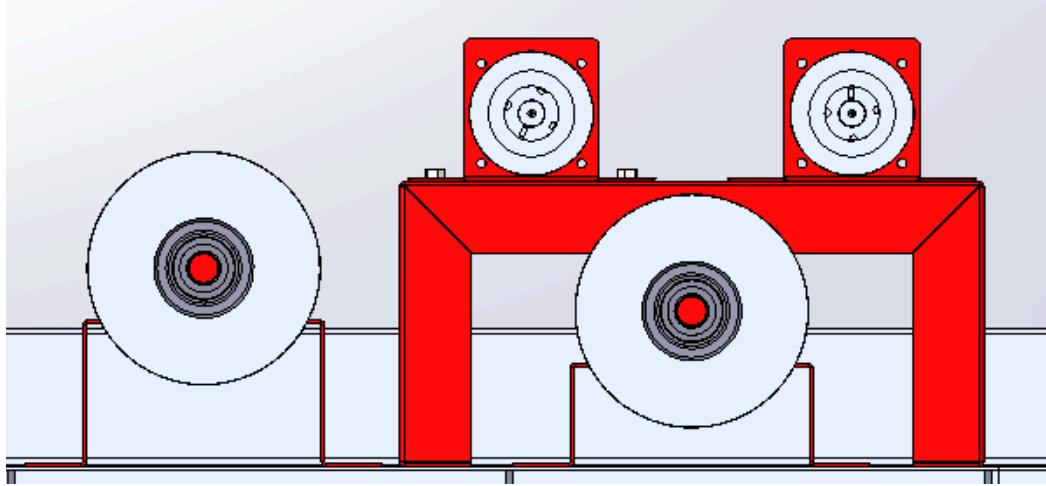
(a): Detailed view of the Motor mounts and X-Axis assembly
